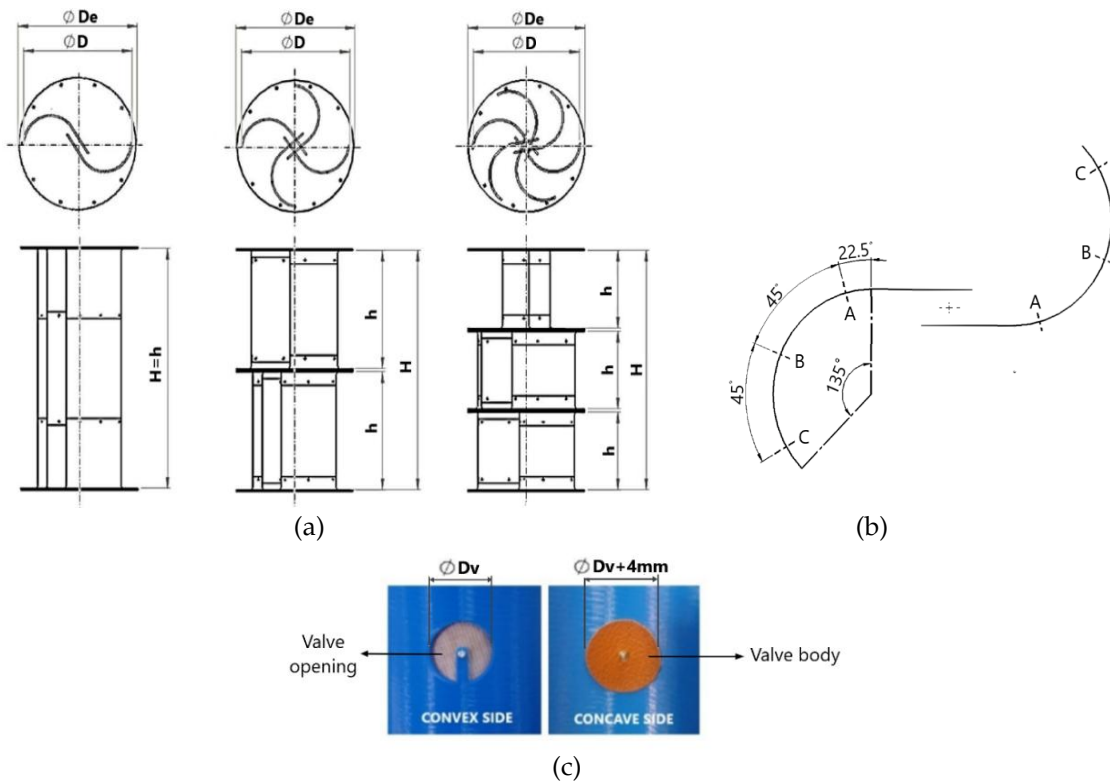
(a) Rotor configuration; (b) Valve locations; and (c) Valve design
